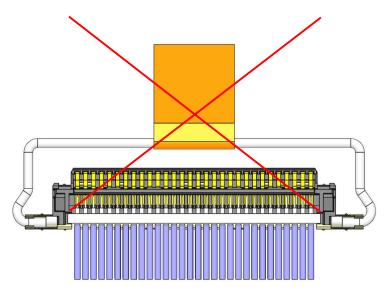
Pull-tape Caution of Pull-tape dimension
